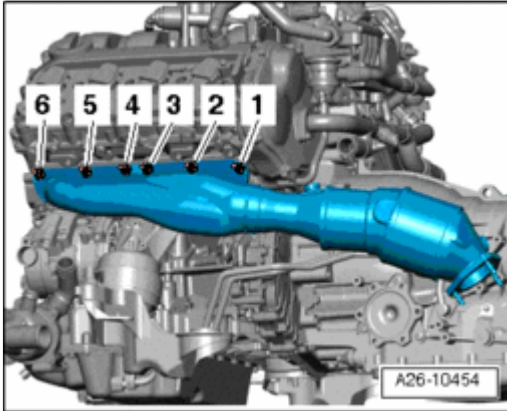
Removing Nuts And Left Exhaust Manifold With Catalytic Converter
